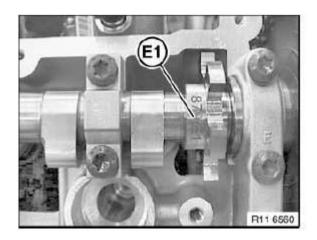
Identifying Letters/Numbers On Camshafts Point (E1) Courtesy of BMW OF NORTH AMERICA, INC.
